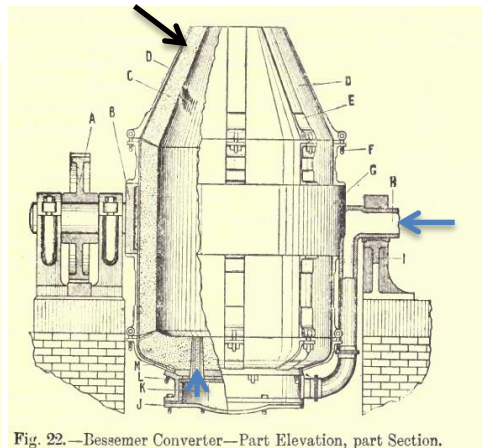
Bessemer Converter—Part Elevation, part Section.
